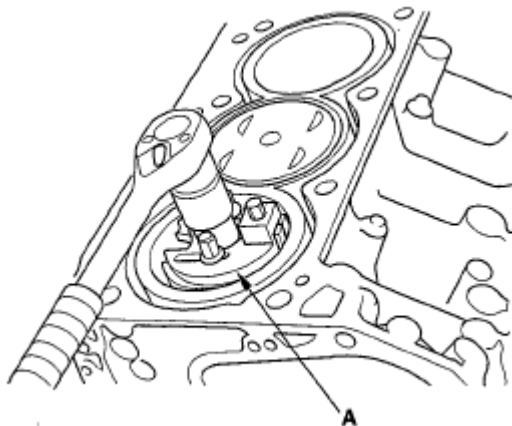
Identifying Hard Carbon Around Top Of Cylinder
